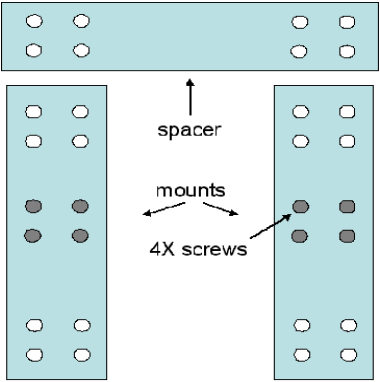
Sketch of the mounts used to install FBG sensors on concrete structure.
